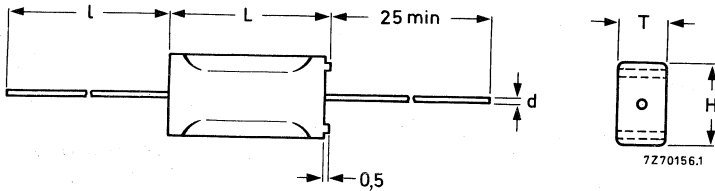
For dimensions T, L, H, d and l, see Table 1.
